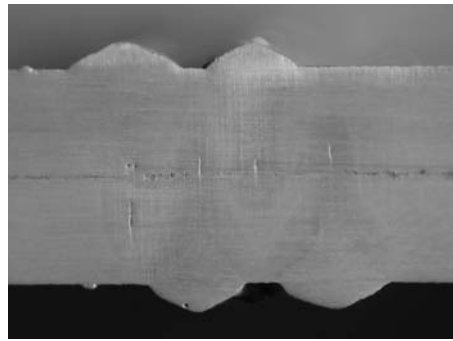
Macro Photographs of the Transverse Stake Welds.
